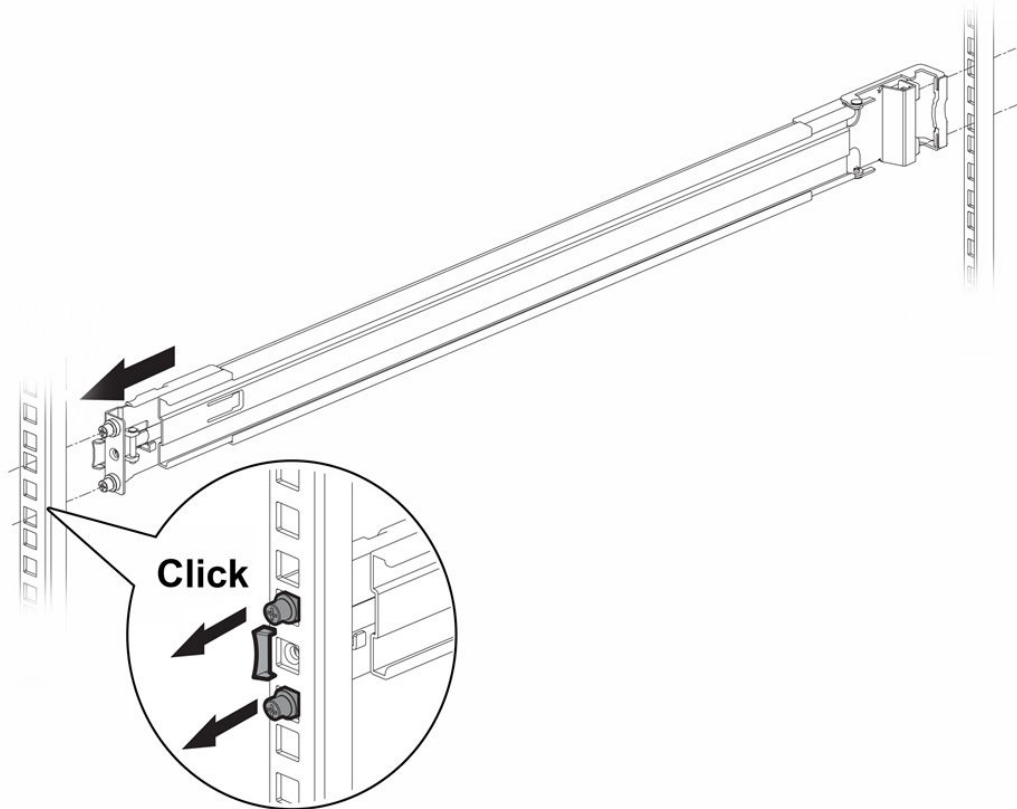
Attaching the Slider Assembly to the Front Rack Post
